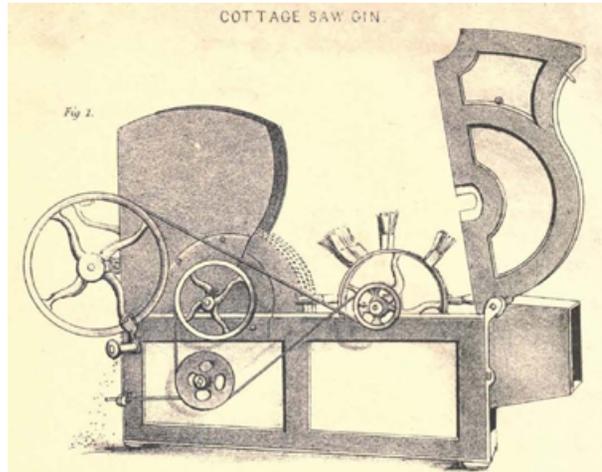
Cottage saw gin. Reproduced from Wheeler (1862).
